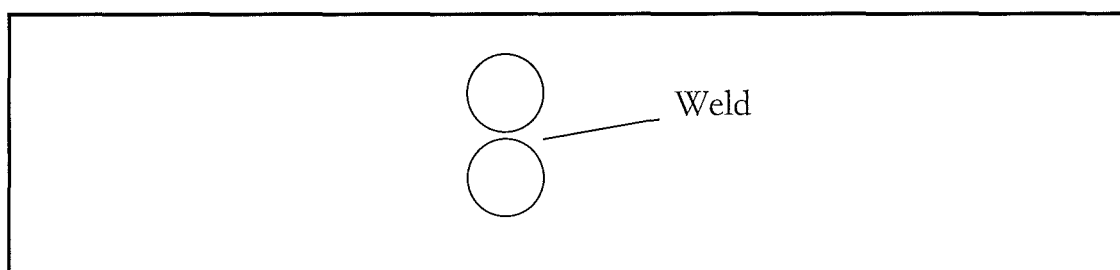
Weld Area in the 50 Gauge Wire Thermocouples.
